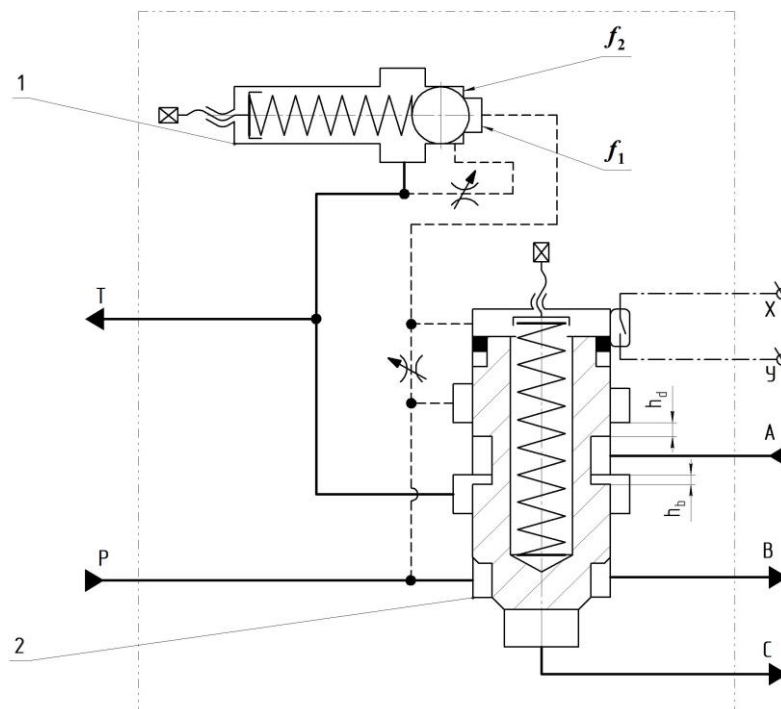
Control device of the embedded hydraulic drive for the belt conveyor
